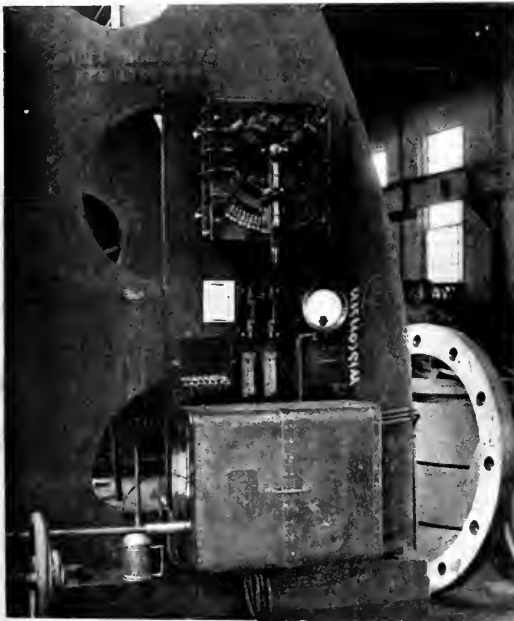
CONTROLLER AND AMMETER MOUNTED ON BORING MILL.
